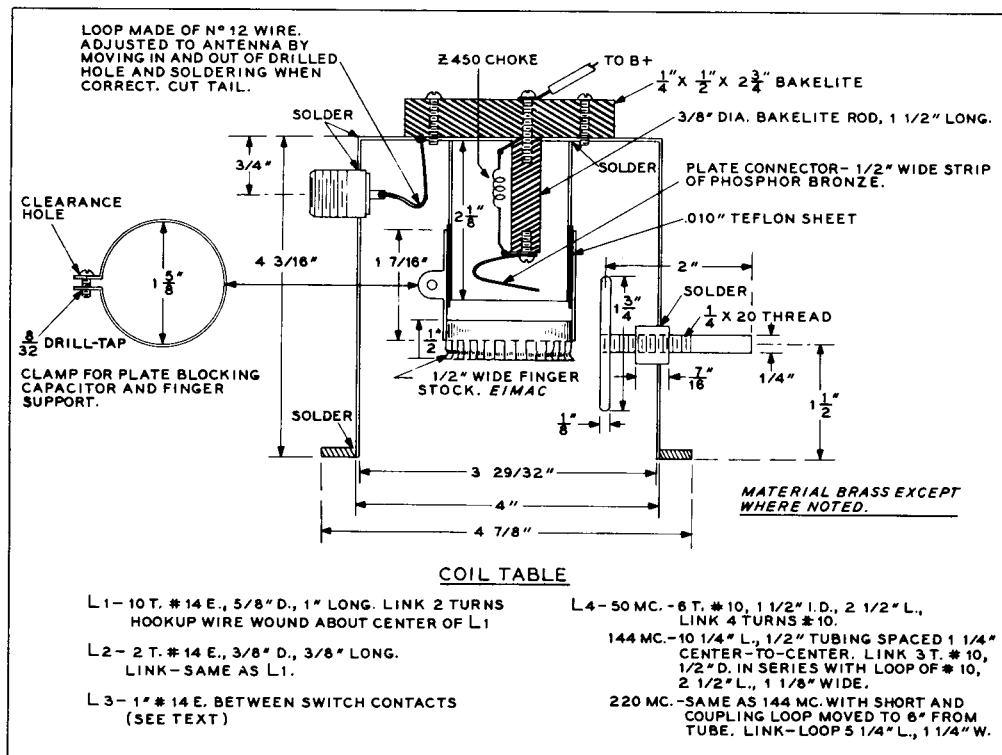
Assembly drawing of 420 mc plate circuit cavity and plate clamp.
